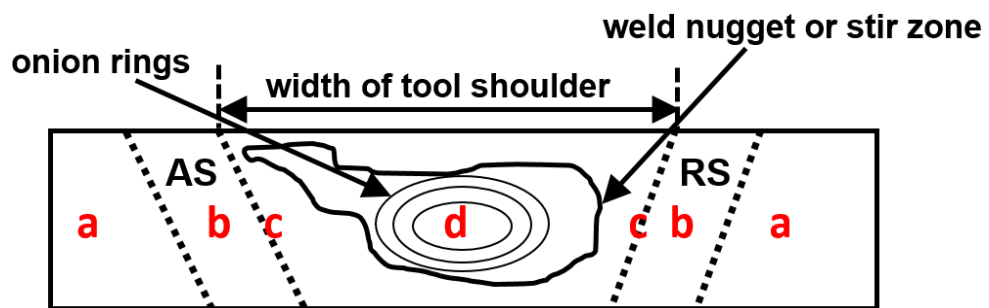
Schematic illustration of FSW weld cross-section shows different weld sub-regions: A- BM; B- HAZ; C-TMAZ; and D- Weld Nugget (Stir Zone)
